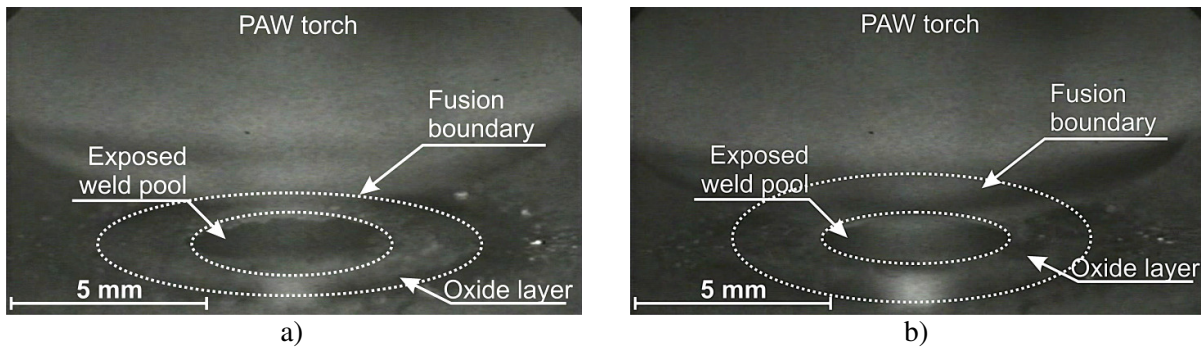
Photographs of DSA spot welds taken using a Laser Strobe imaging system produced using a 2 kW welding power, 2 second weld time, and a ramp down time of: *a)* 2 seconds; *b)* 3 seconds
